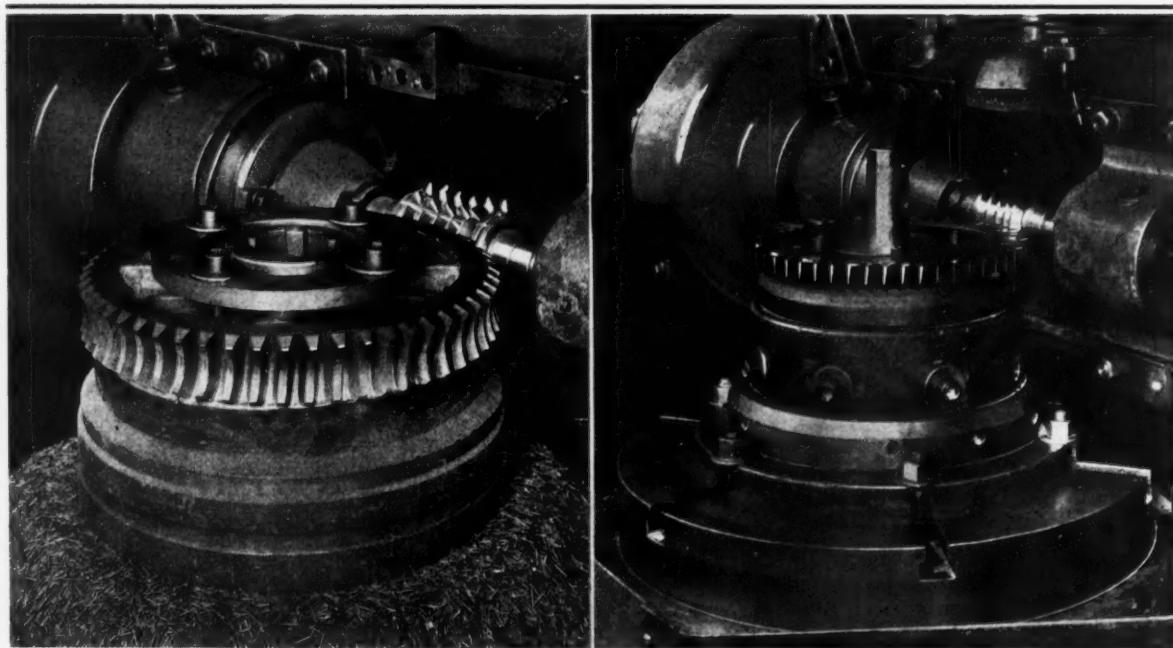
The Same Machine can be Used to Produce Worm and Worm-wheel Interchangeably. To the Left, the Worm-wheel Teeth are Being Hobbed; to the Right, the Worm Thread
